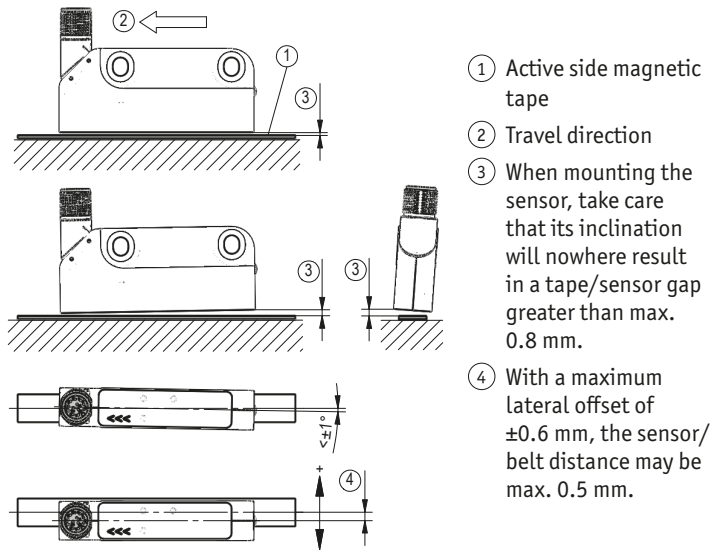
Mounting tolerances, dimensions in mm
